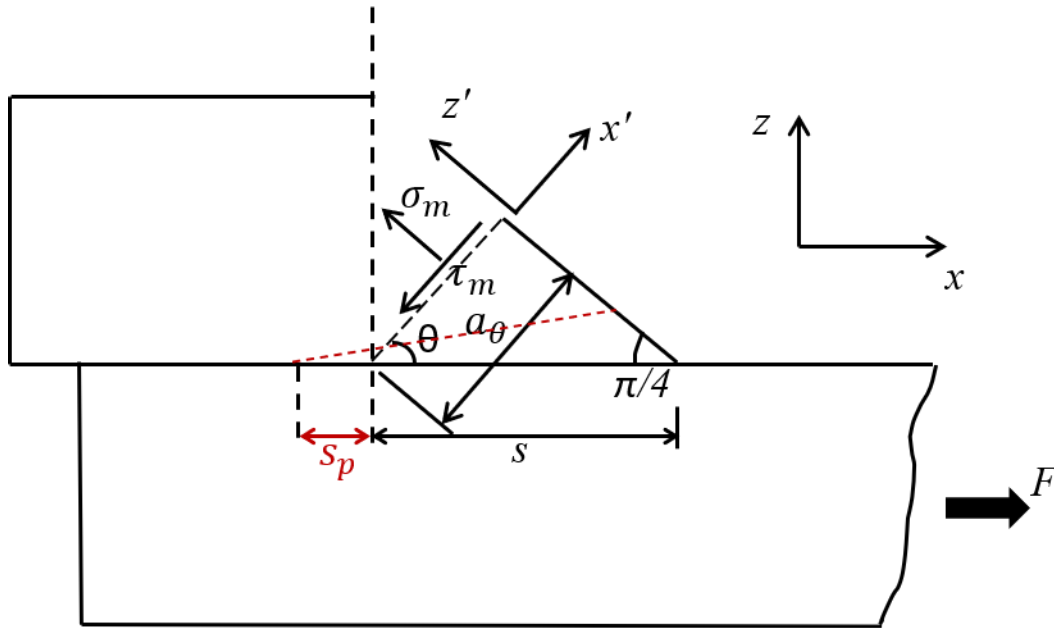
Weld penetration in load-carrying fillet weld
